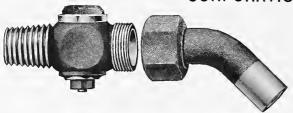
BENT COUPLING, COARSE THREAD ON LONG END, FOR WOOD PIPE.
